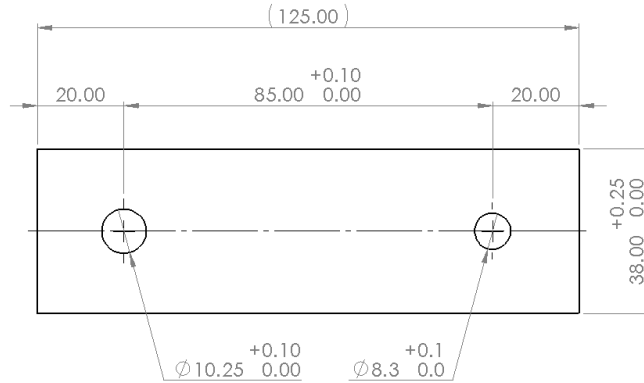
Single sheet geometry for Renault Group and University of Waterloo SPR cross-tension specimen sheet metal joint testing
